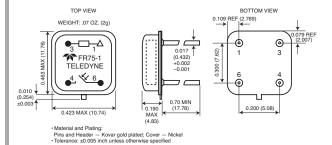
FR75-1 mechanical specification; dimensions in inches (mm)
